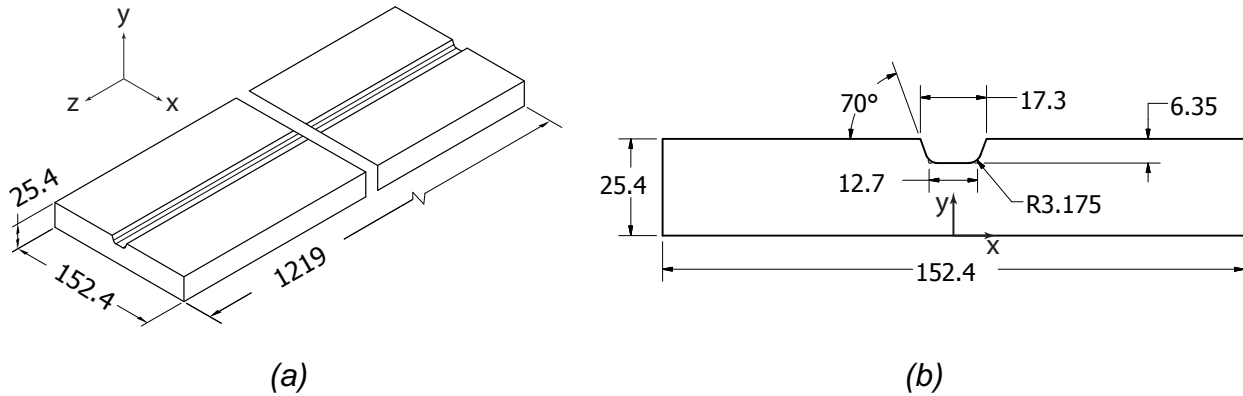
Dimensioned diagram of the plate (a) overall geometry and (b) cross-section with details of the machined groove. All dimensions are in mm
